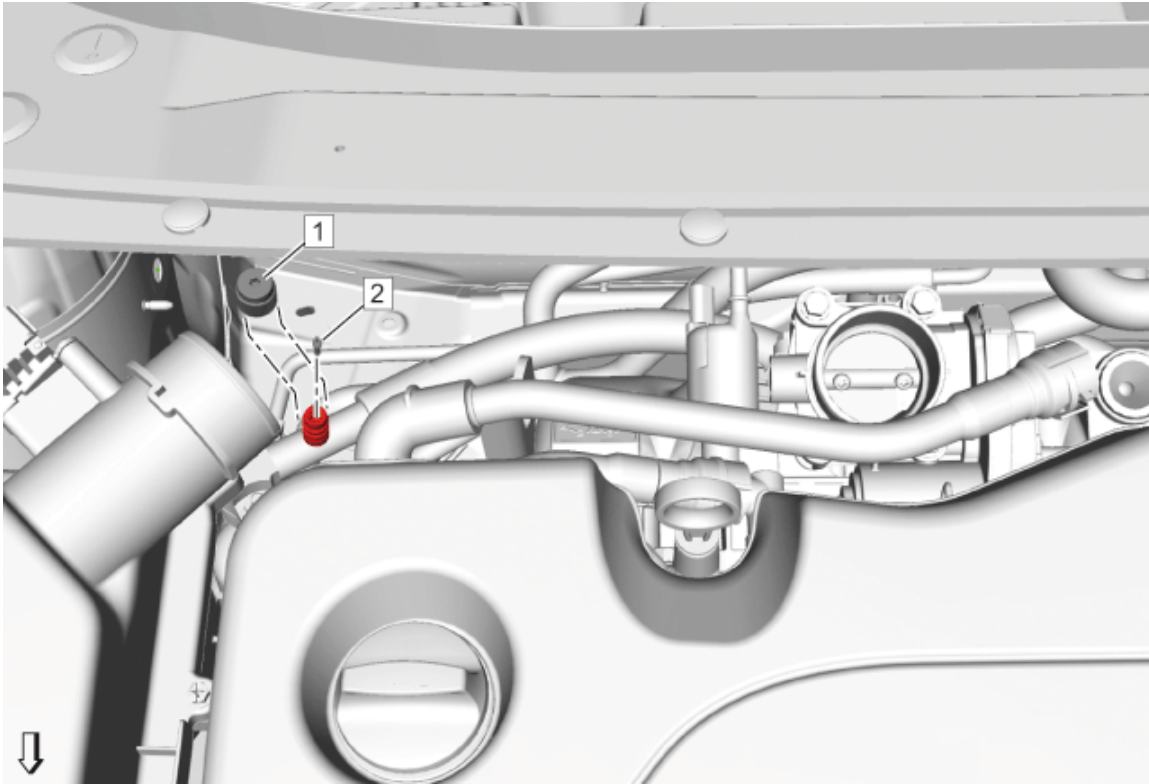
Air Conditioning Refrigerant Low Pressure Service Valve
